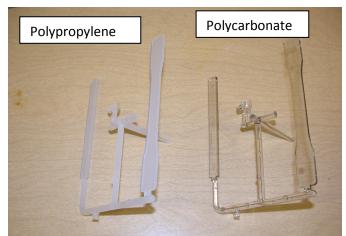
Injection Molded Polypropylene and Polycarbonate ASTM test specimens
